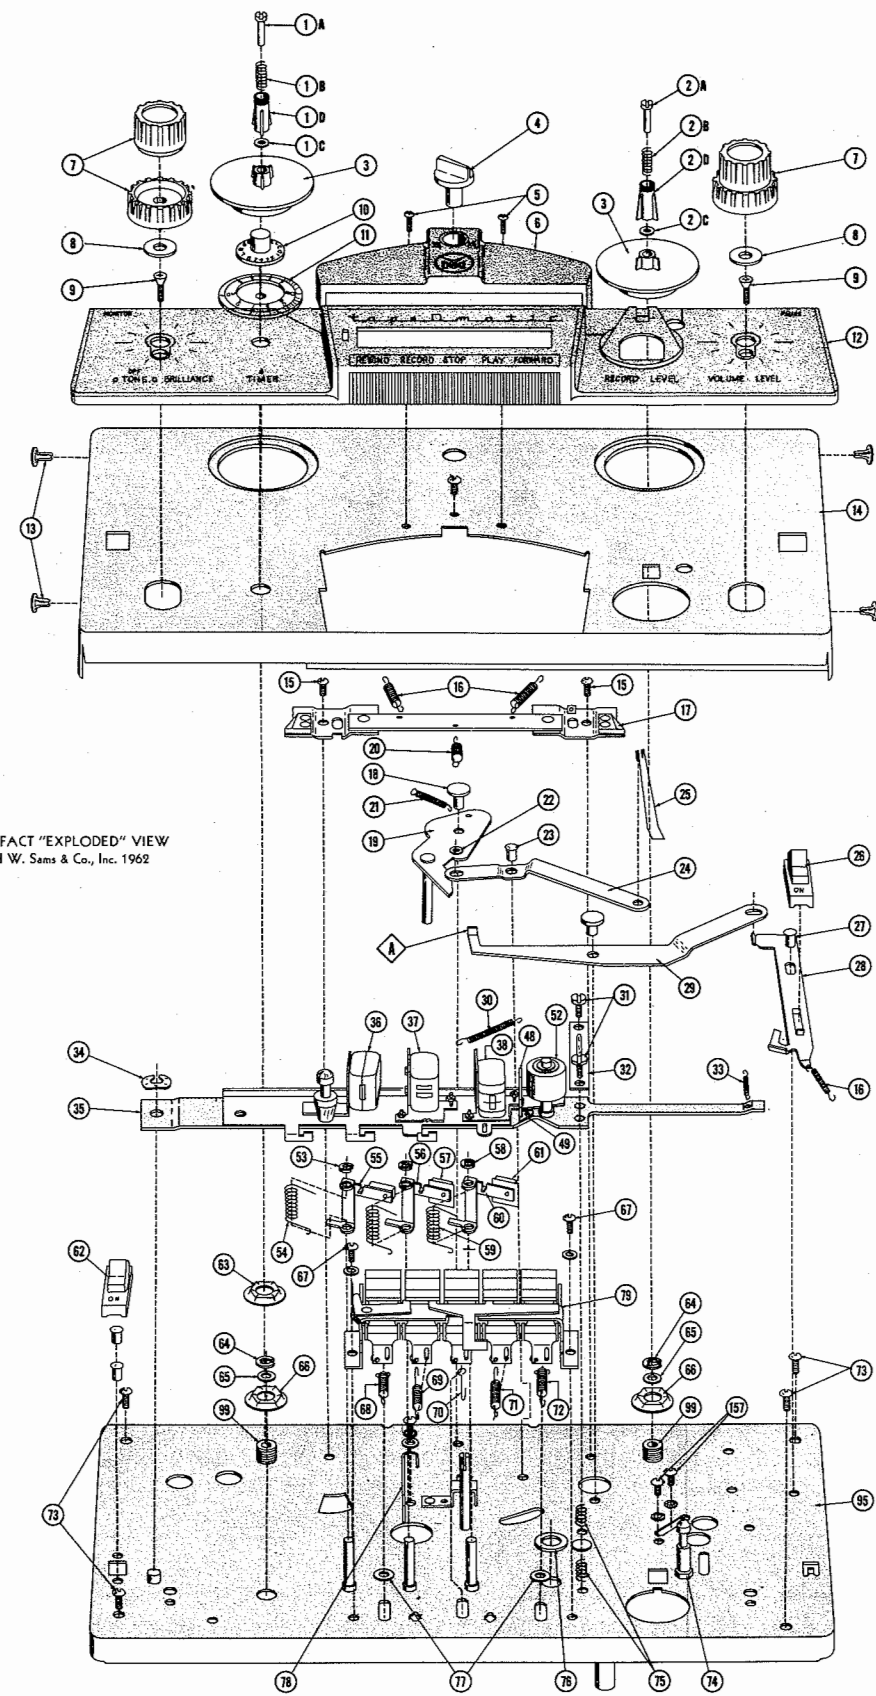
A. Exploded View of Tape Transport Assembly Above Base Plate.
